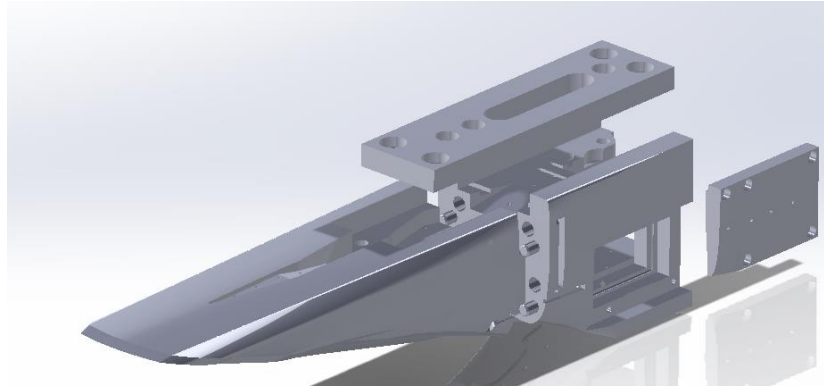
Exploded view of completed model, showing both sections after the break, instrument routing, the plate for mounting, and the blanks used for complete pressure data.
